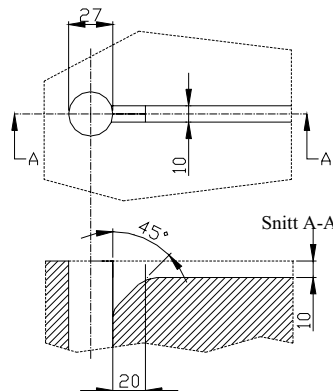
Schematic view showing an example of how the tracks on the bentonite block surface were connected to the sensor holes.
